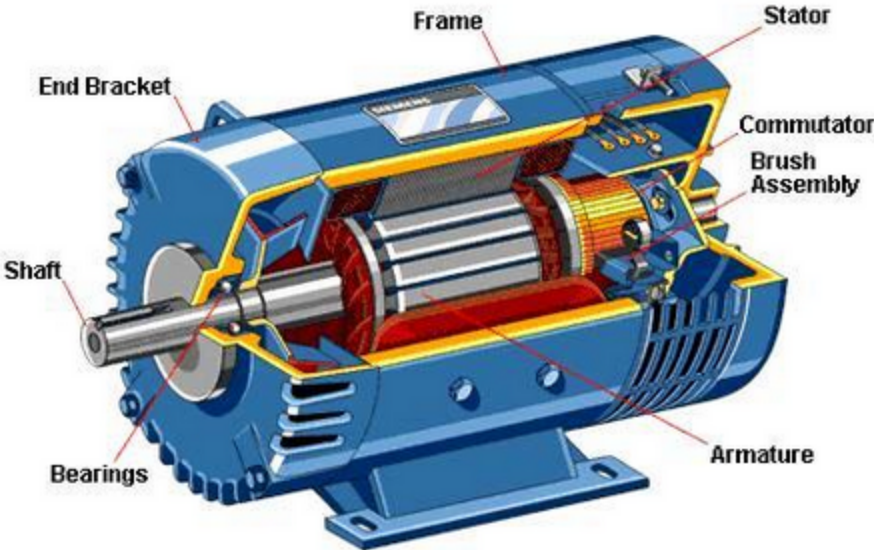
Brush DC Motor Assembly
